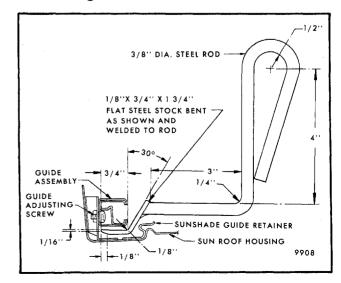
Sun Roof Guide Rail Adjustment Tool
